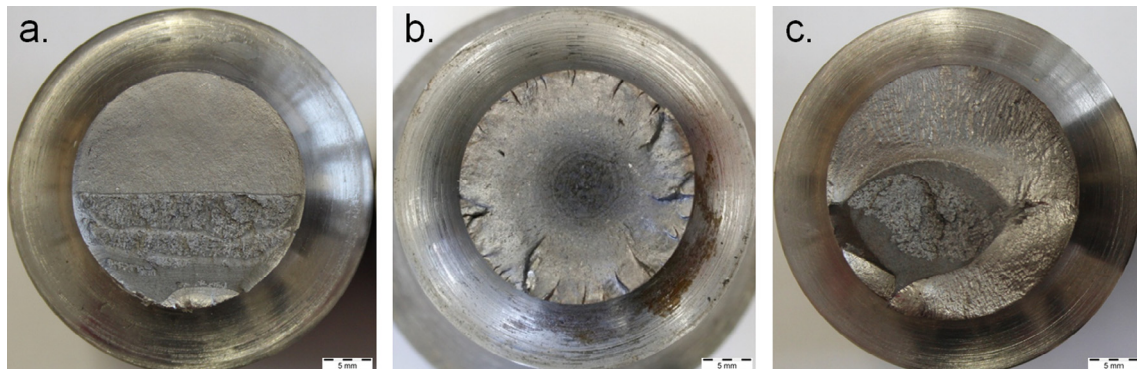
Fracture surfaces of large-scale specimens tested under AB (a), RB (b), and MA (c) loading.
